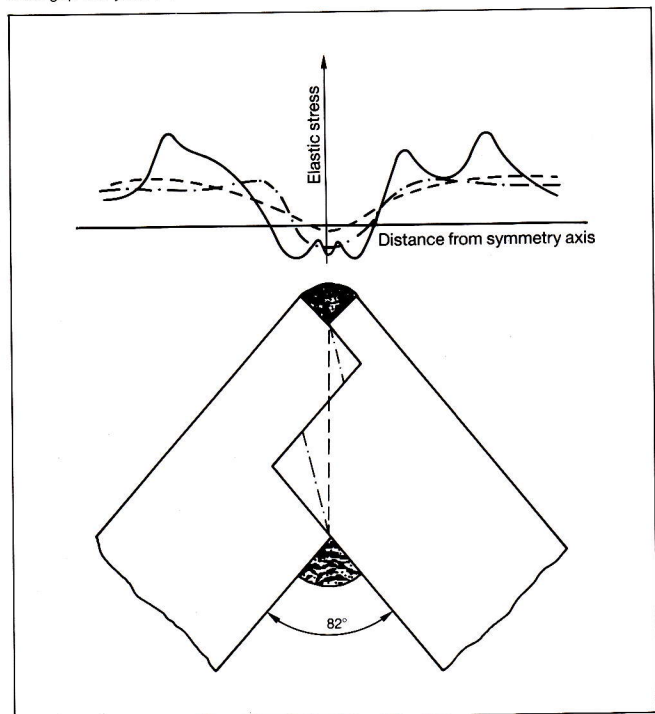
a) Example of an V shaped joint produced in 7000 alloy; the shape of the weld gap ensures ballistic protection.
